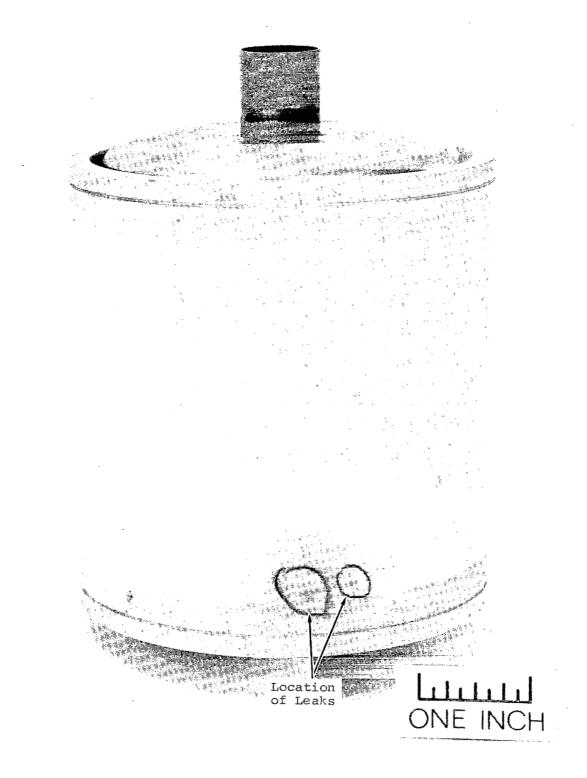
Photograph of Thermalox 998 (99.8% BeO) - (Cb-1Zr) Brazed Bore Seal Capsule No. 1
